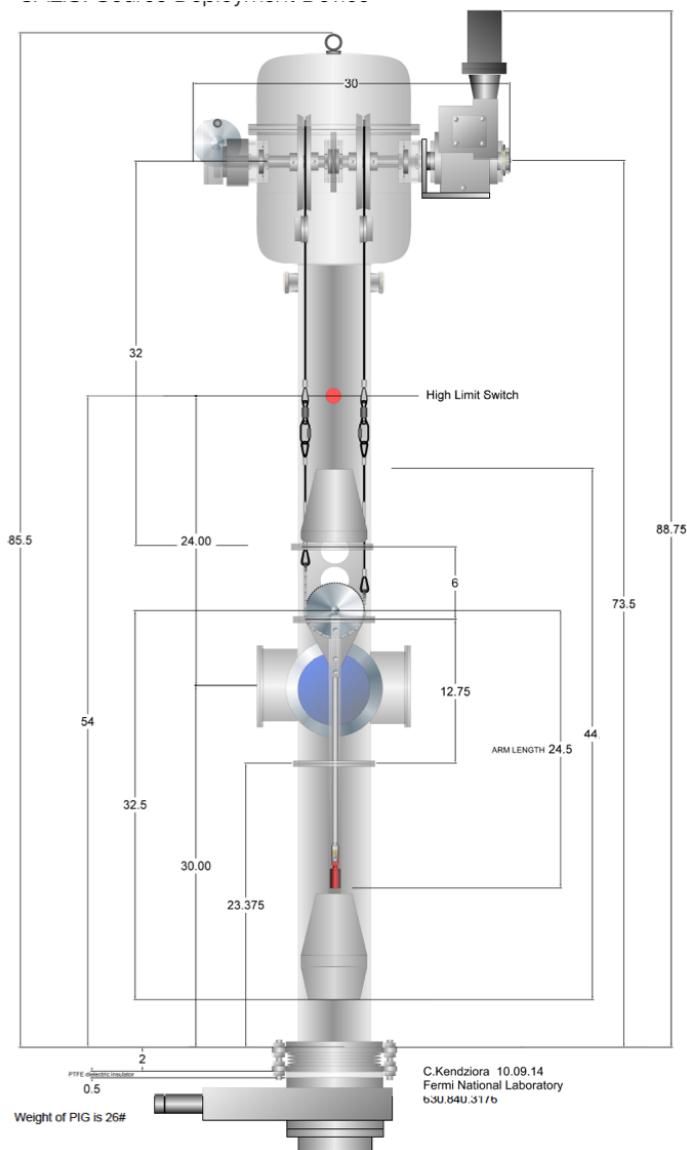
Mechanical drawing of the full device with dimensions in inches (centimeters) shown. The arm length is variable, the 40.31 cm (15.87 inch) long arm is shown in the figure.
